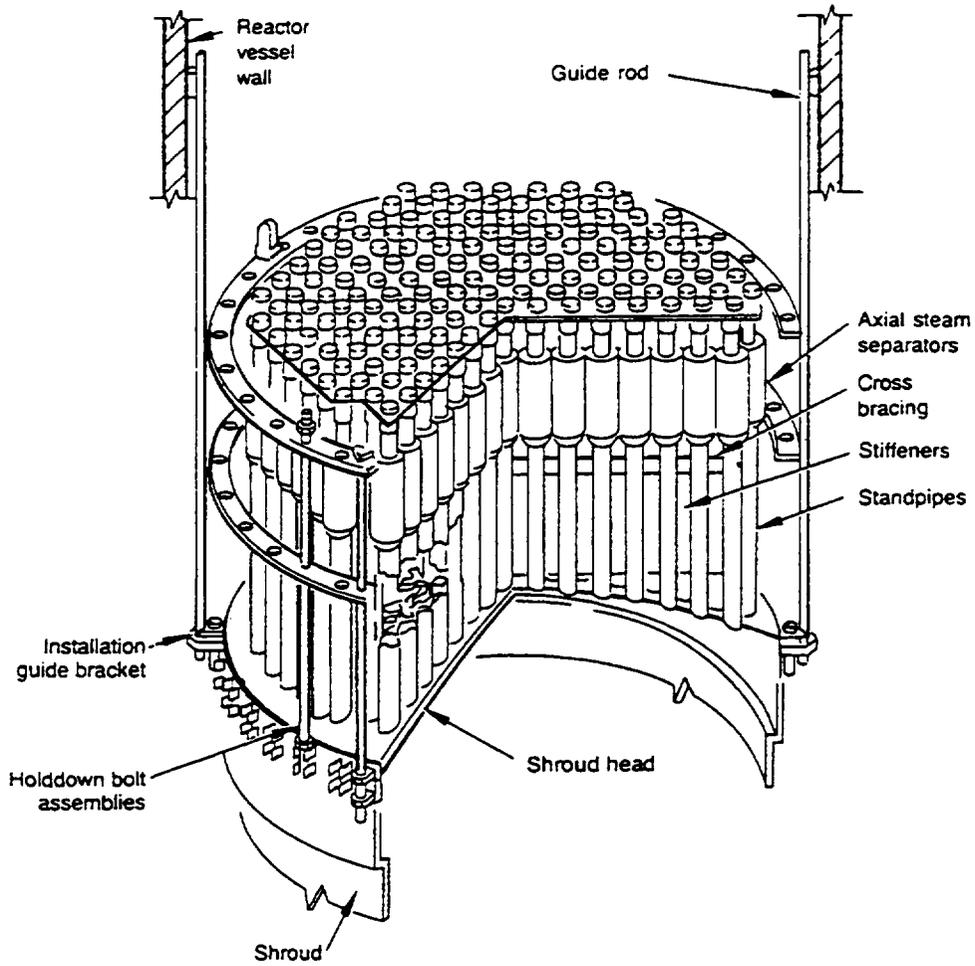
Arrangement of core shroud head, head bolts, standpipes, steam separators, and guide rods.
